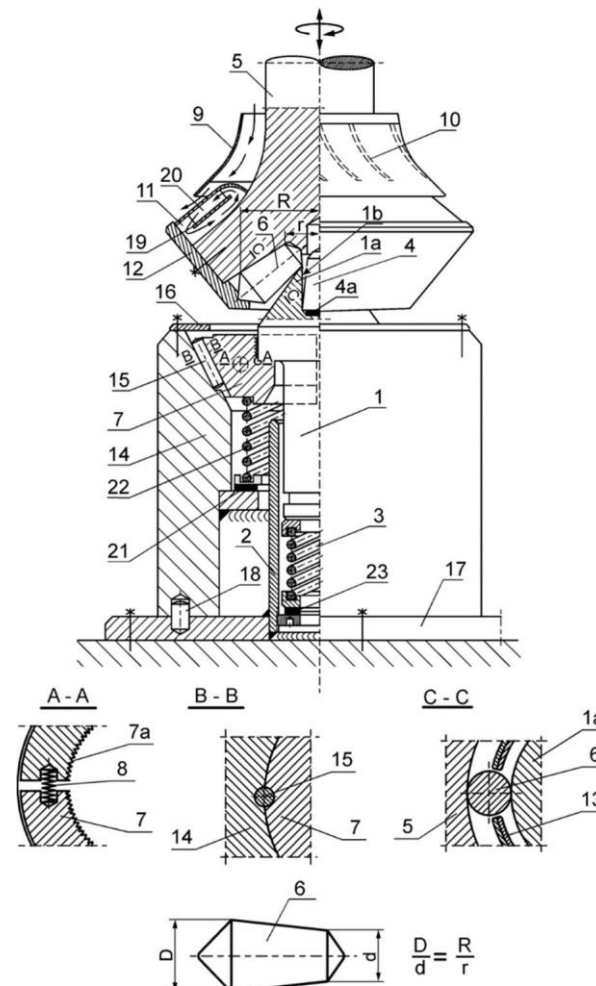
Device for fixing tips of point-attack picks by rolling (description in the text)
